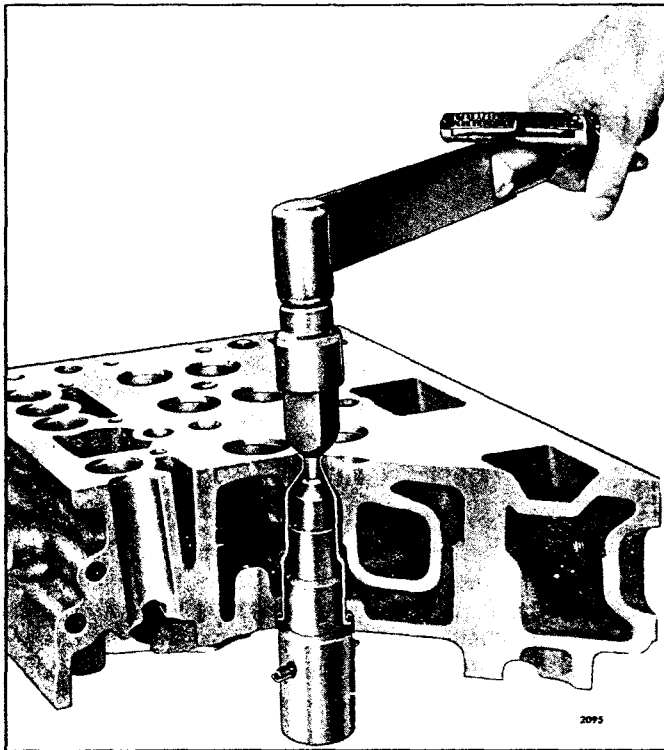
Upsetting Injector Tube Using Tools J 5286-4A and J 5286-6
